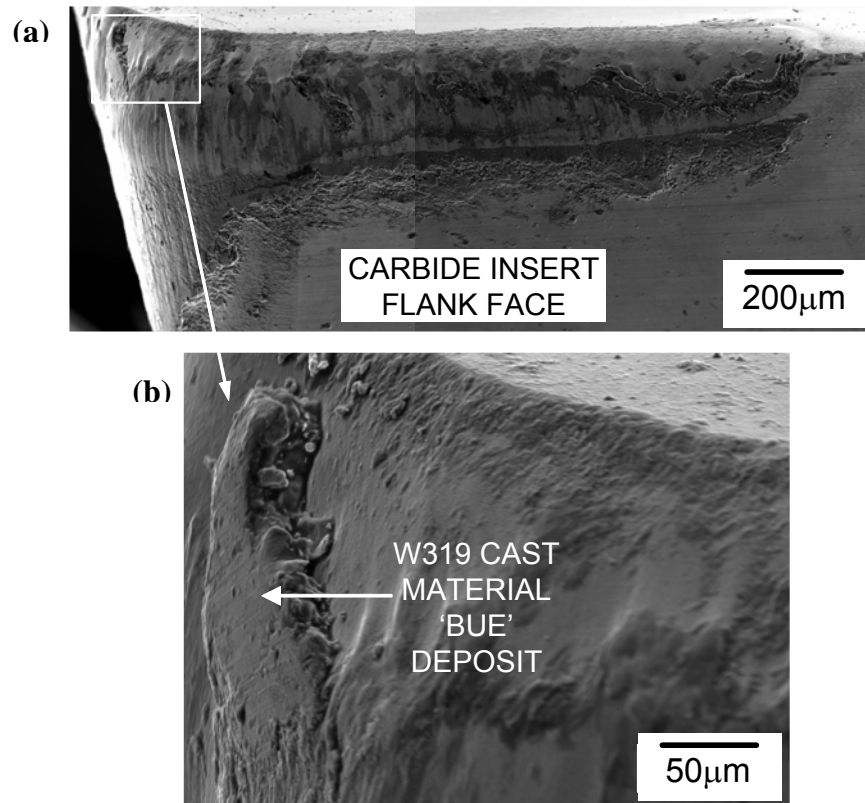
UC insert's flank face wear (a) due to the material sliding during the MQL HSM of 15%ESV/W319 bi-metallic microstructure. W319 casting material build-up-edge (BUE) at the tool tip (b) is indicated on the worn flank face.
